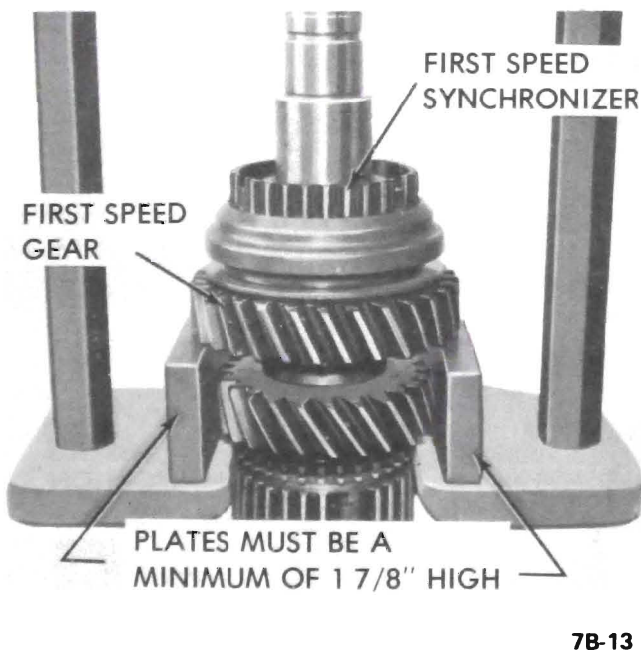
B-13 - Removing First Speed Synchronizer Assembly
